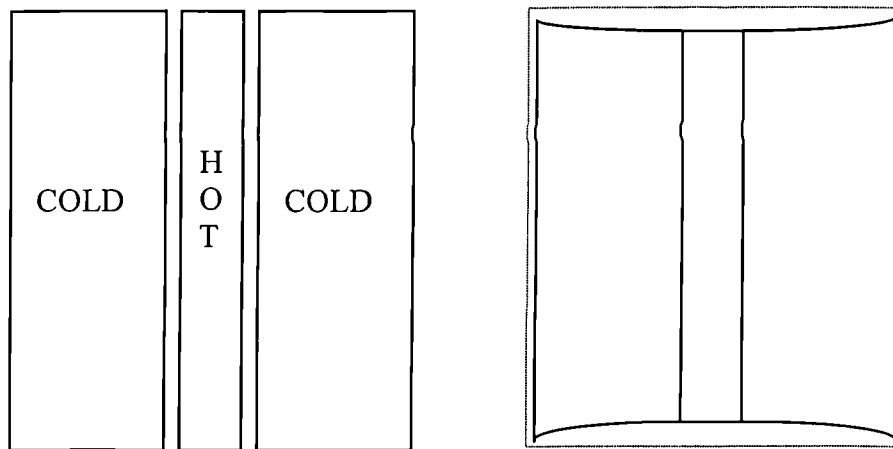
Schematic distortion of a butt-welded plate due to shrinkage of hot weld metal [Parlane, 1981]
